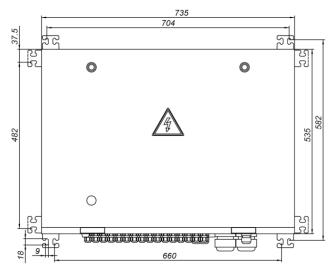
Dimensions drawing SSB-A-14, SSB-A-25
